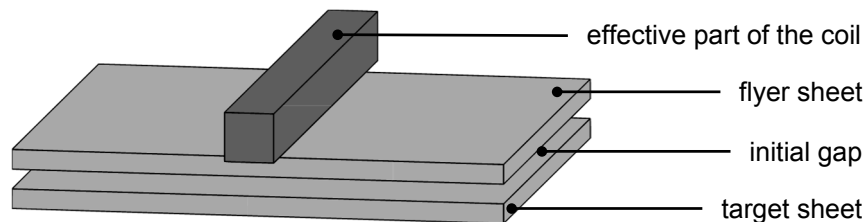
Sketch of the electromagnetic pulse welding setup
